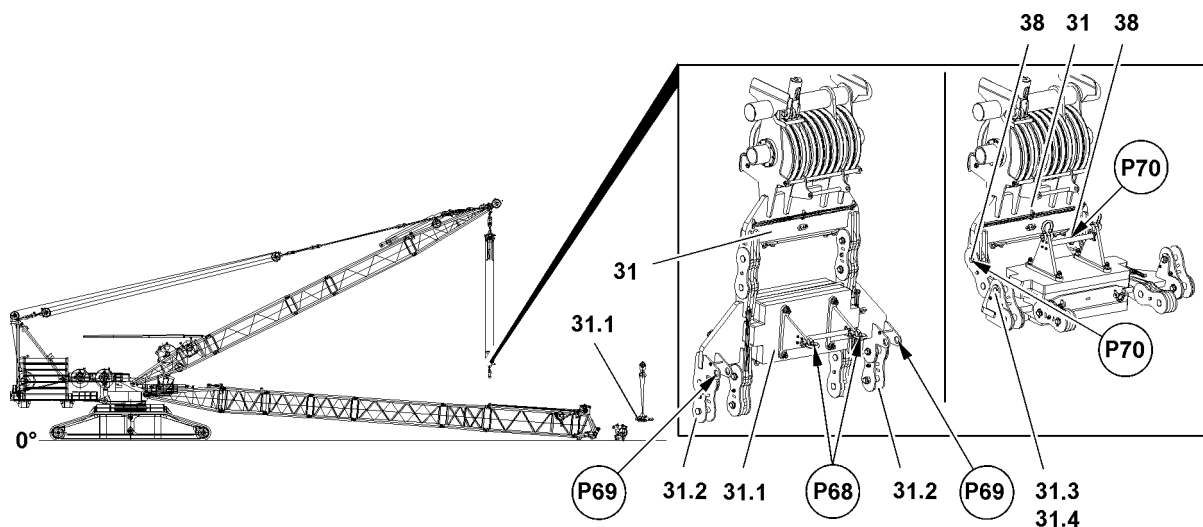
Assembling the guy rods - Disassembling the assembly weight
